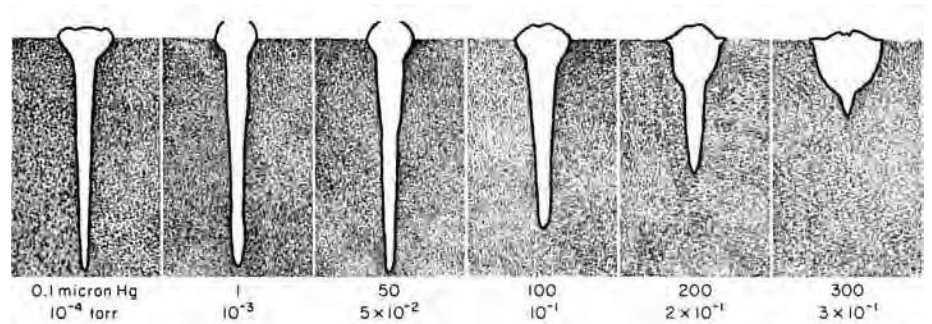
Effect of welding-chamber pressure on penetration and weld shape for type 304 austenitic stainless steel
